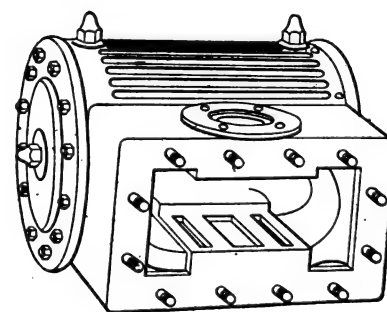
DOUBLE-FACE BALANCED VALVE.
